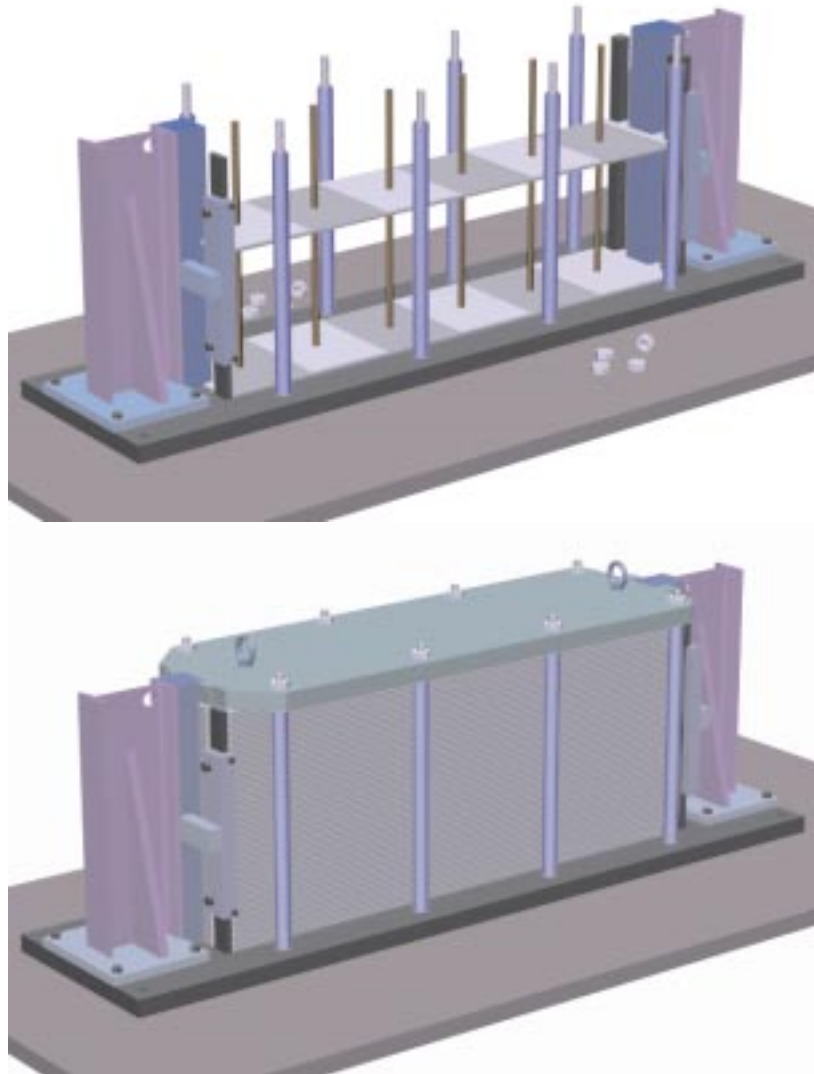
The submodule assembly tool. Up – master plate insertion. Down - all plates stressed for hardening.
